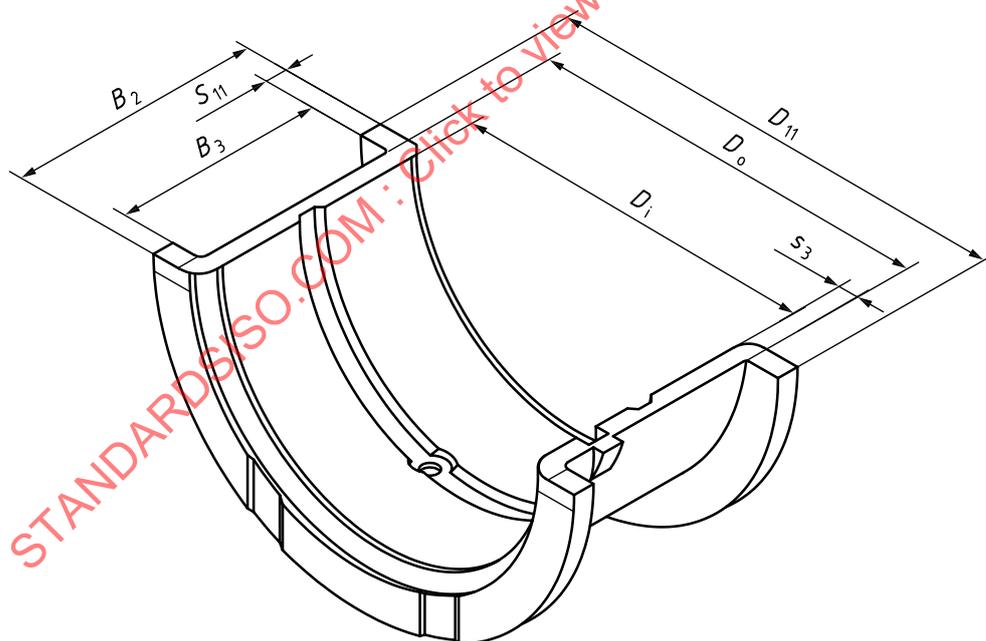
Flange half bearing, integral or assembled, excluding free spread
